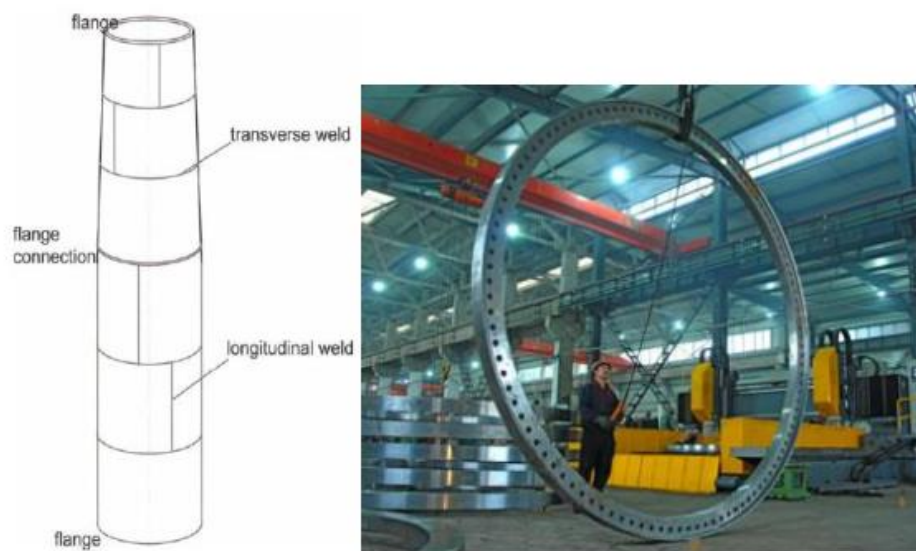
Steel tubular tower in two sections and ring flange [4].
